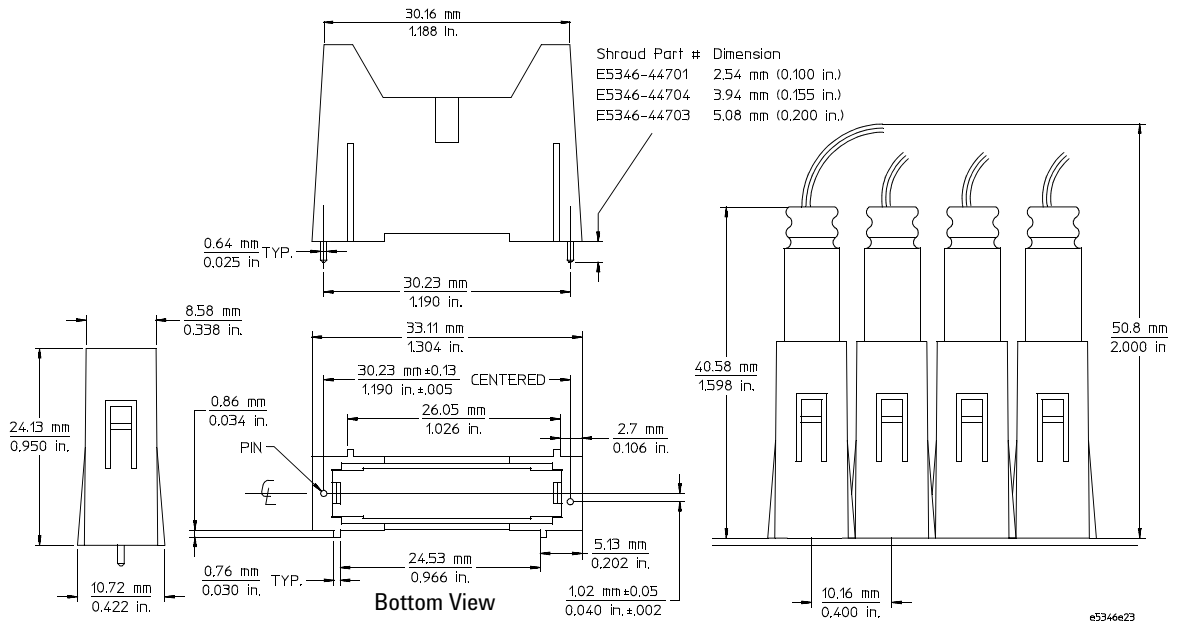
Support shroud dimensions for the MICTOR 38-pin connector
